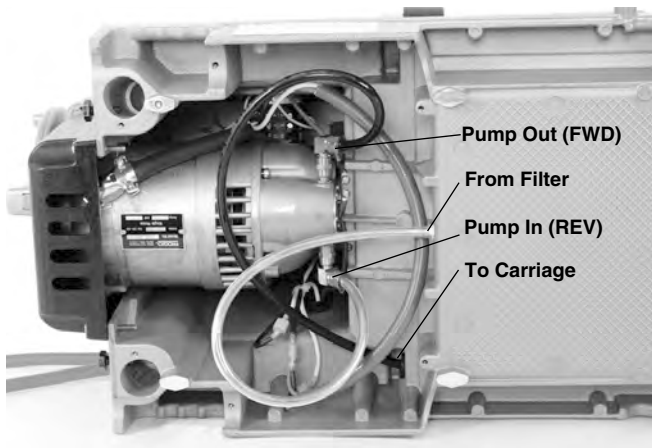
B – Oil Pump Connections for Right Hand Threading (Switch in "FWD")
